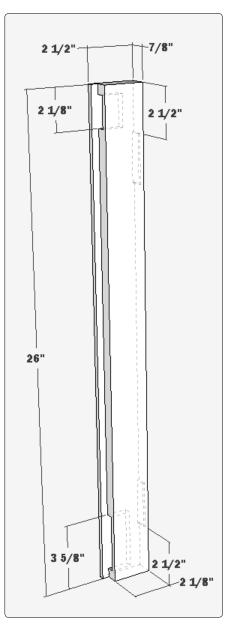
shows a rear view of the door assembly after completing the door stile component. Copy the stile and move it to the opposite end of the reference rectangle. Execute a flip along component's red command to orient the joinery properly. See Figure 53.
